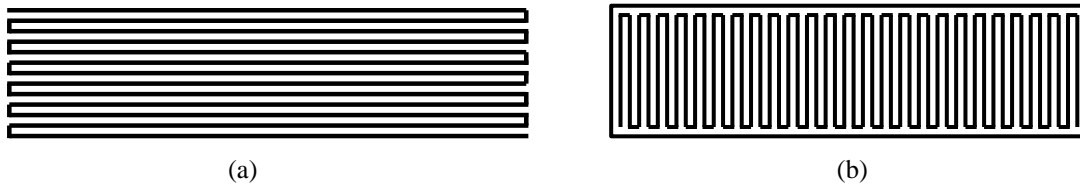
Anisotropy test specimens: (a) 0° fill angle and (b) 90° fill angle
